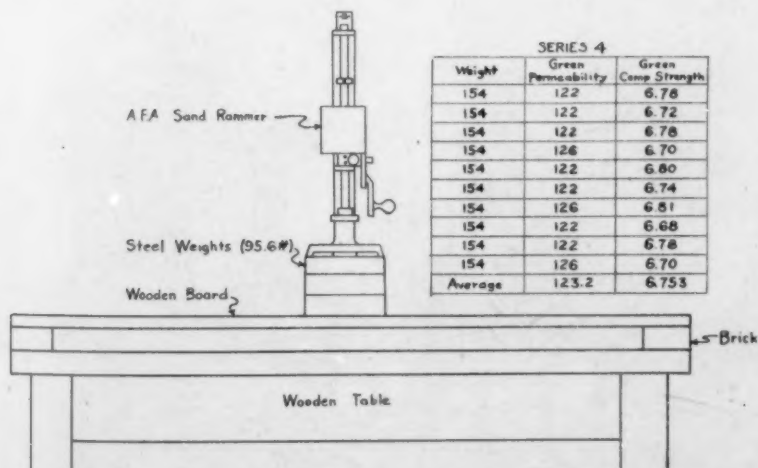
A.F.A. SAND RAMMER MOUNTED ON WOODEN BEAM WITH 95.6-LB. REACTION BLOCK.
